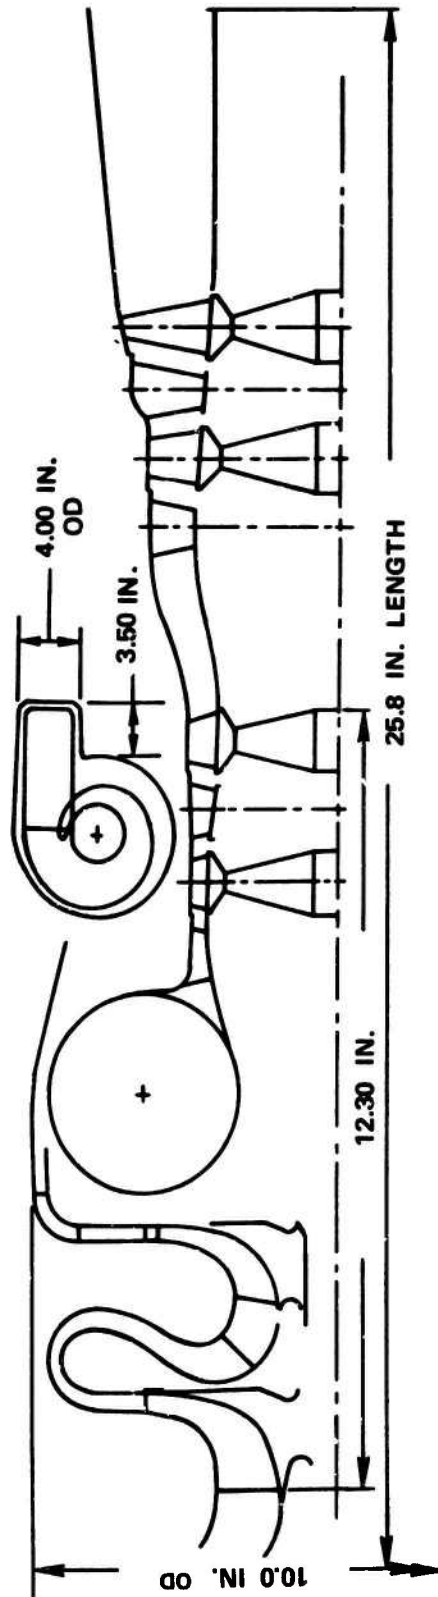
Turboshaft Engine Schematic With Two-Stage Centrifugal Compressor, Can Combustor, and Two-Stage Axial Turbine.
